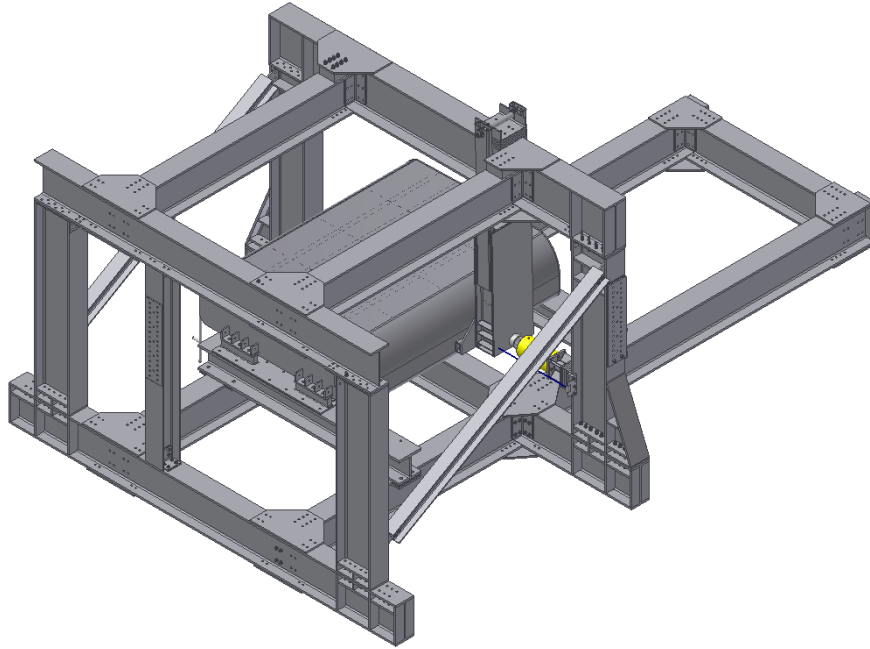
Test Fixture and F59 Tank Configuration for Side Impact Load Case
